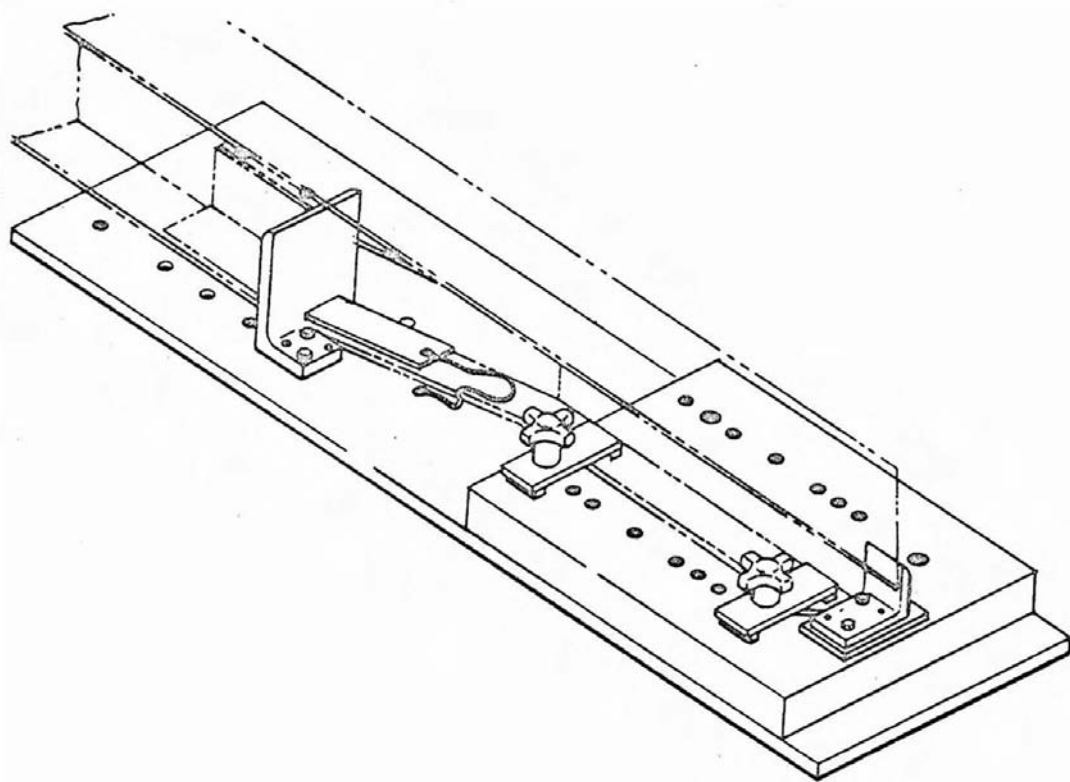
11. Base Heatshield Beam Assembly, Assembly Fixture
